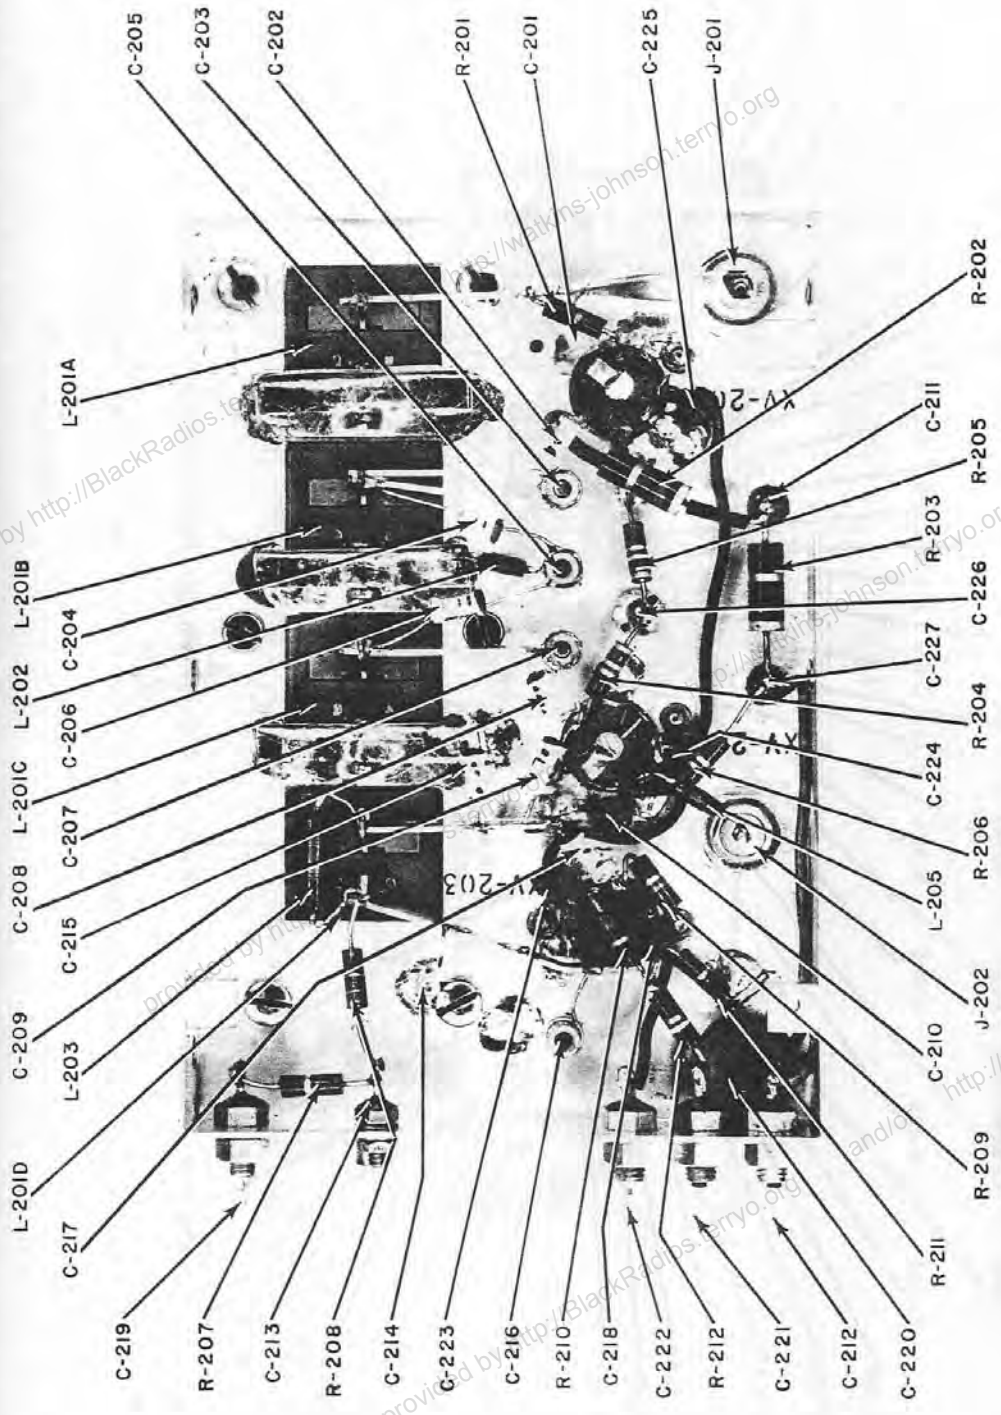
Tuner, Models 1670-F and 1670-J Special Purpose Receivers, Bottom View (Dust cover removed)
